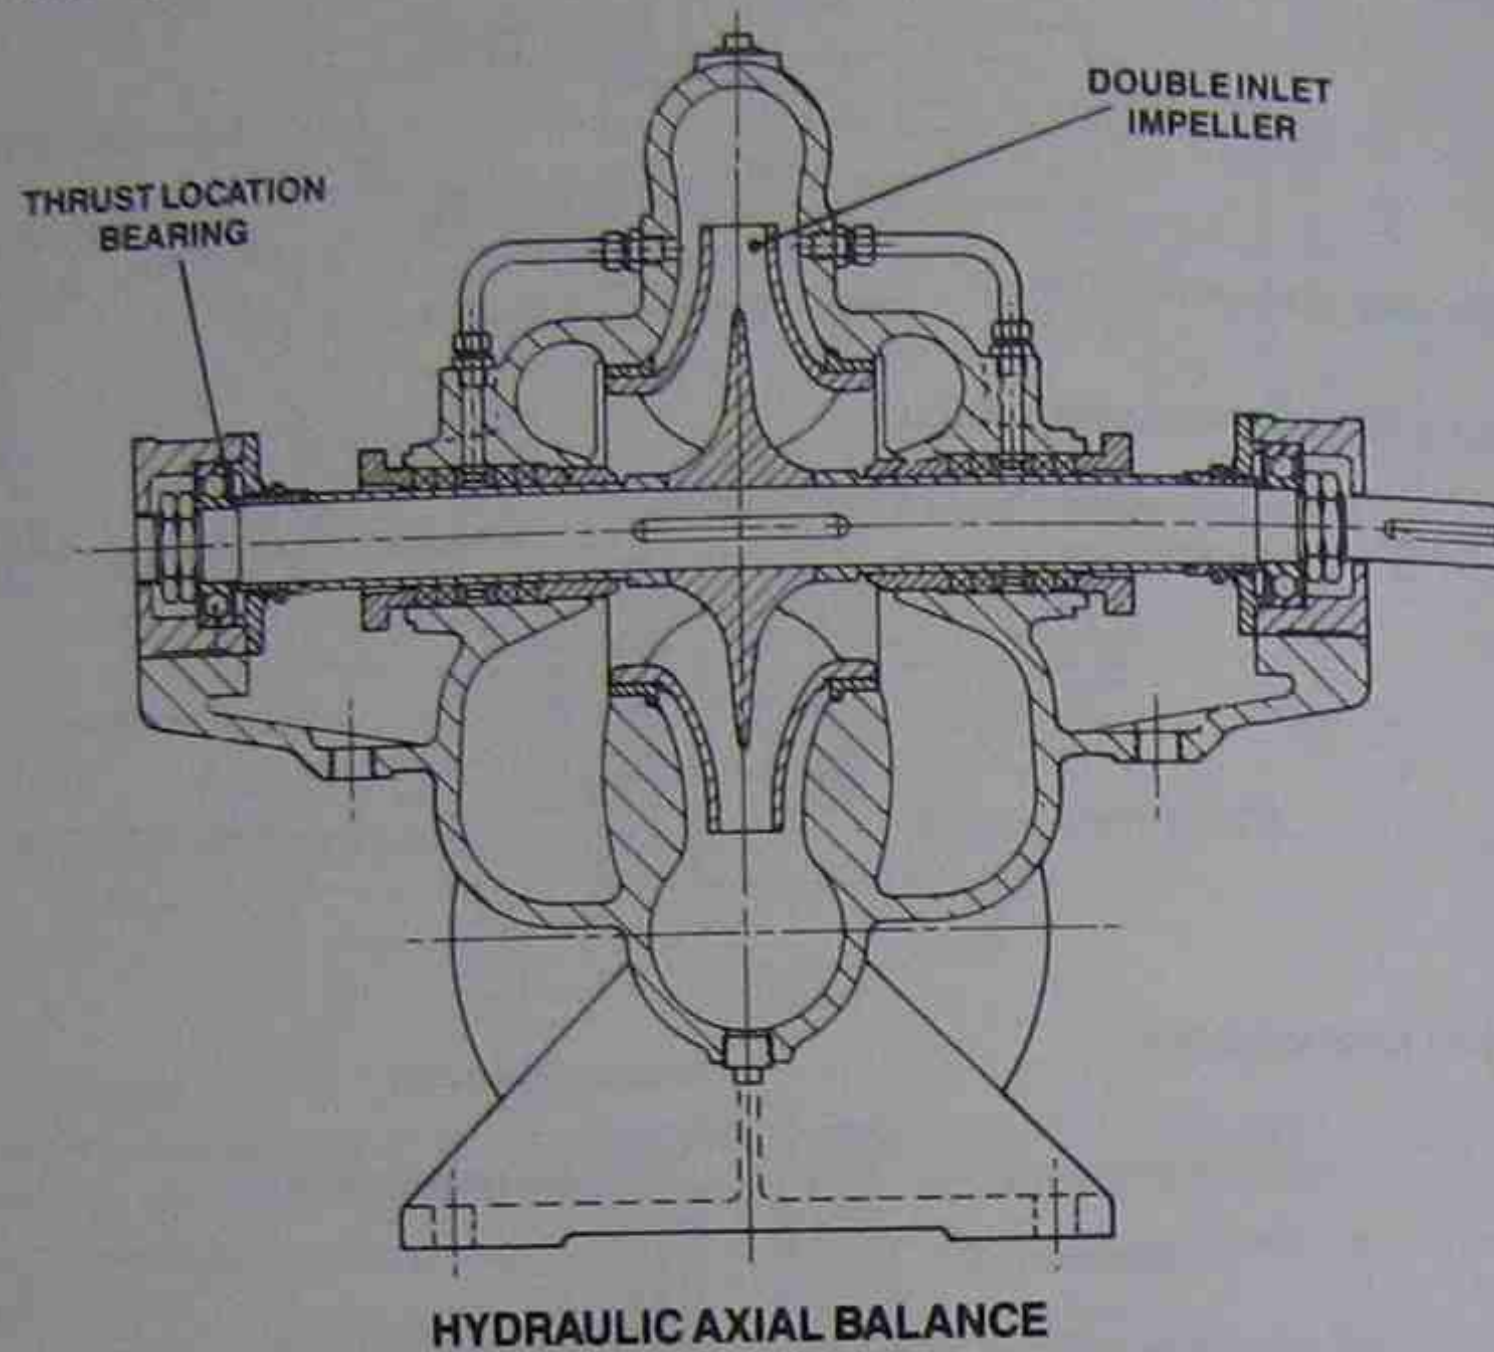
Hydraulic Axial Balance With Double Inlet Impeller.
